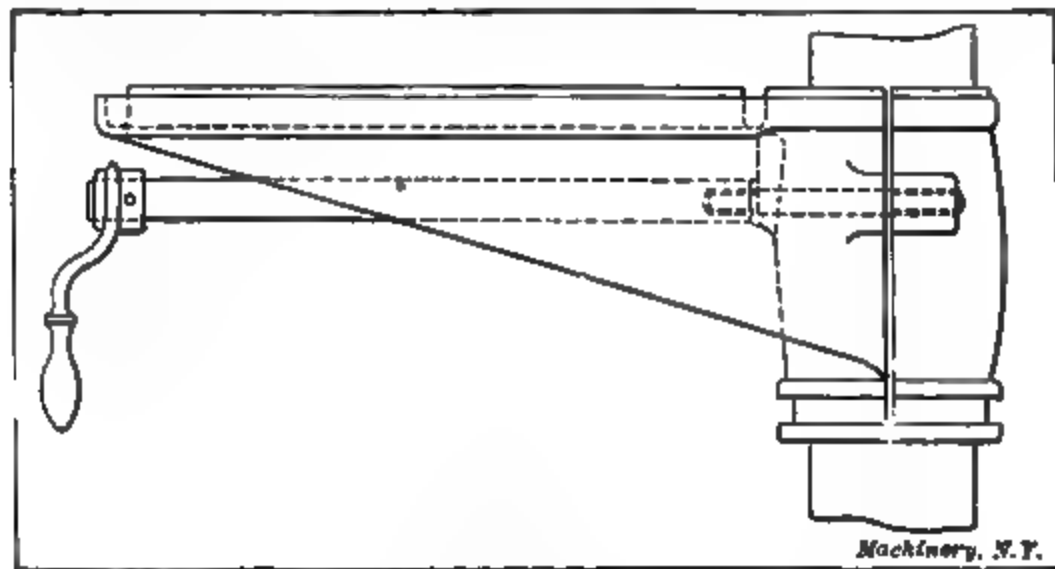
Clamping Handle carried out to Edge of Table for Convenience of Operation
